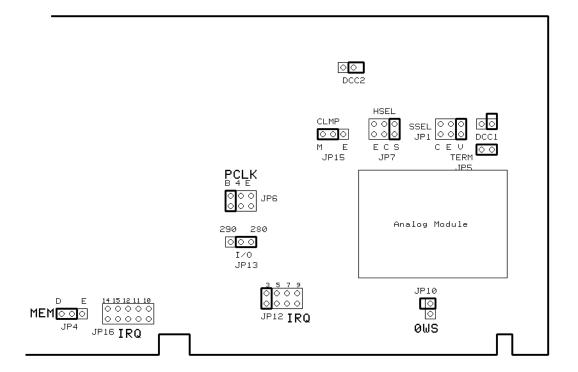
Motherboard Jumper Locations and Standard Settings
